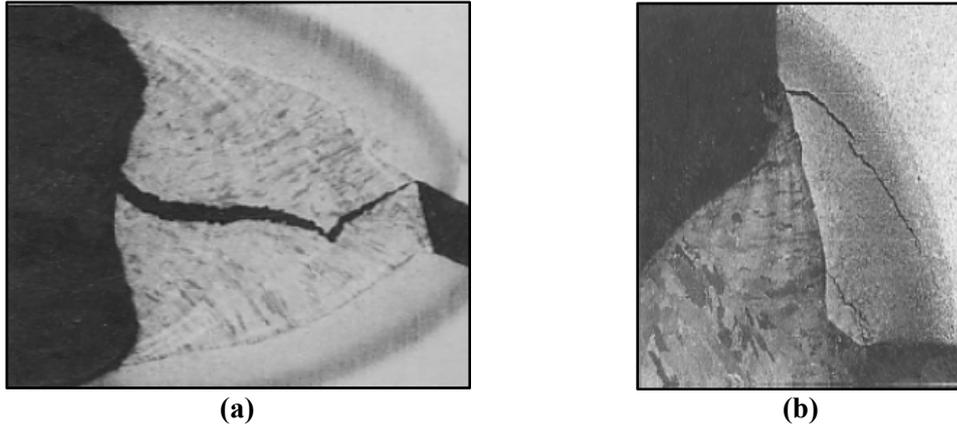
Example of Cracking at (a) Weld Metal, and (b) HAZ
